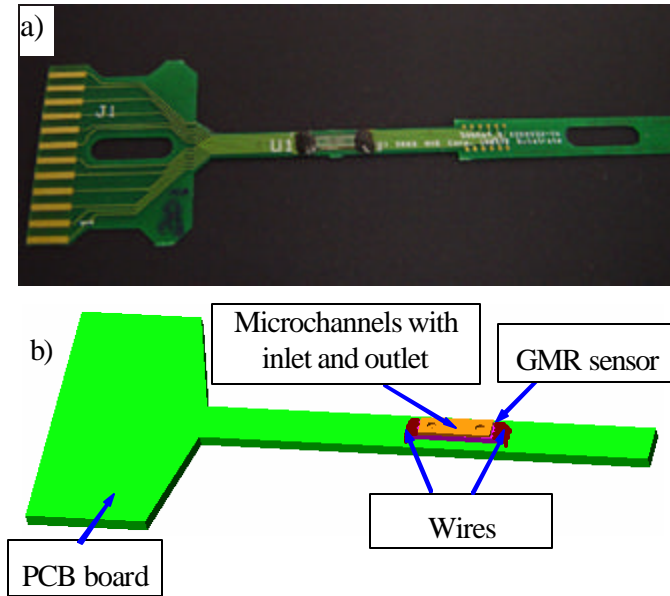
(a) A picture and (b) a 3D model of GMR sensors with PCB
